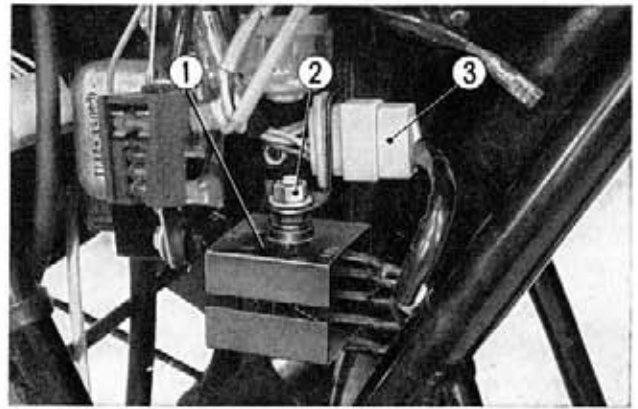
① Silicon rectifier ② Rectifier setting nut ③ Connector
